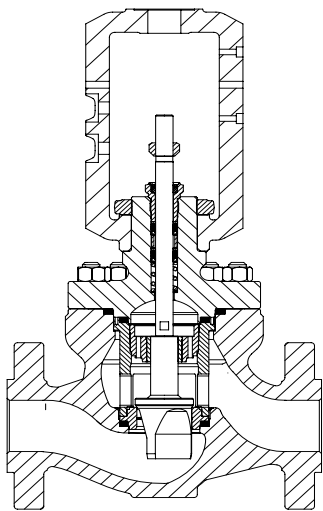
Type 251GR Globe Valve operated with clamped-in seat
